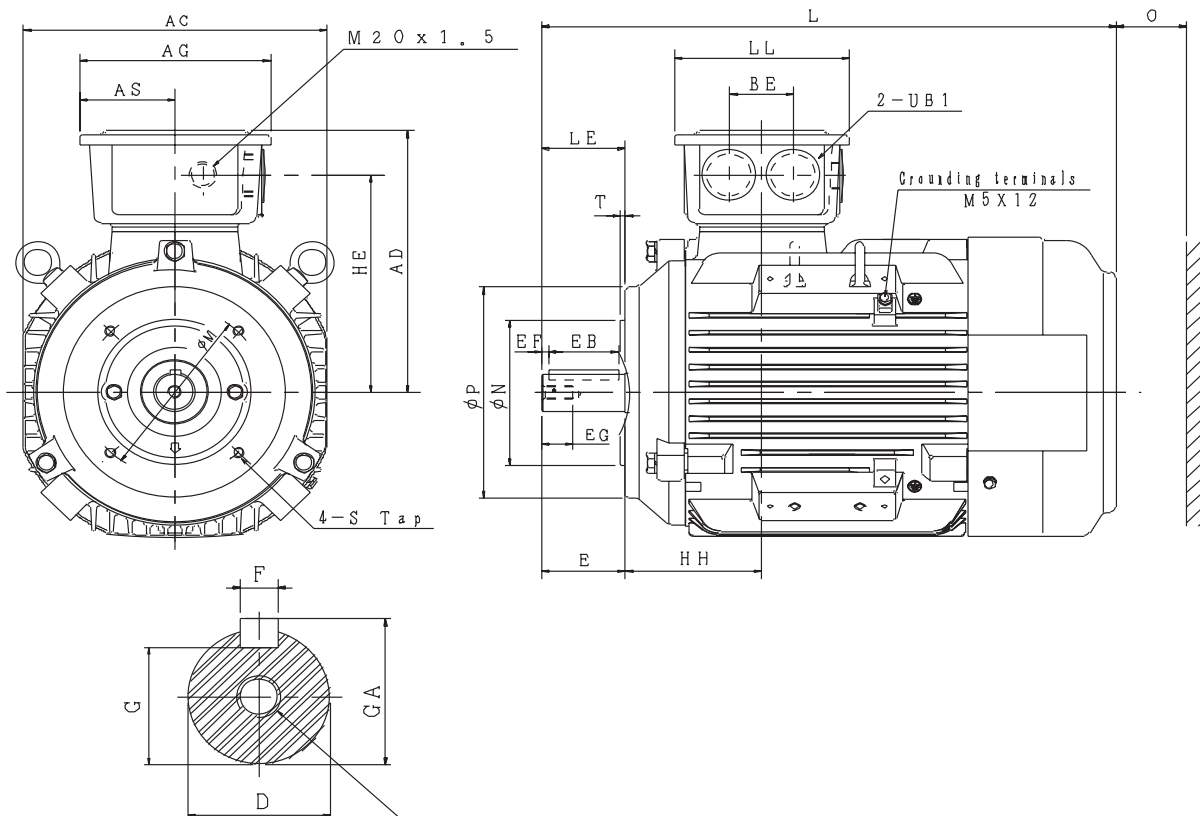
Outline drawing of cast iron design, feet version, mounting B14; frame size 132S - 160L
